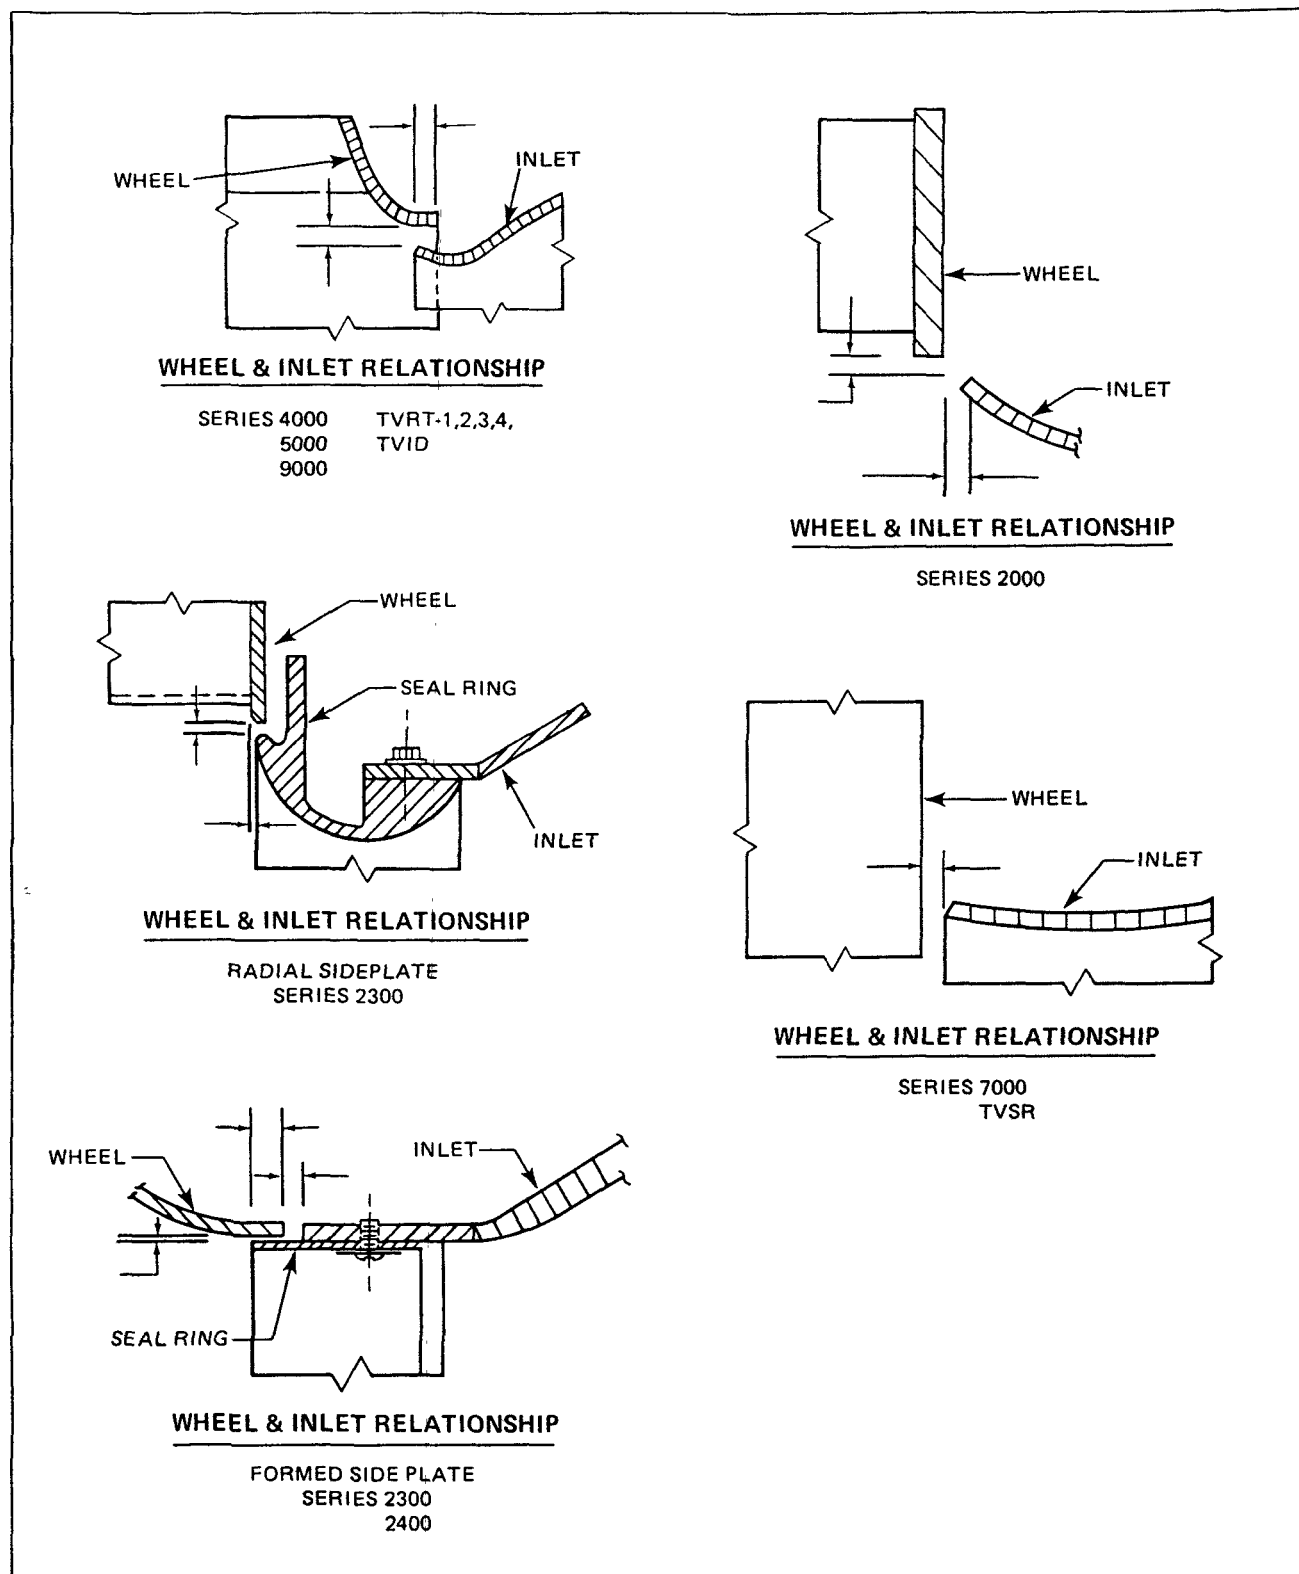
Typical Wheel-Inlet Relationship Details
